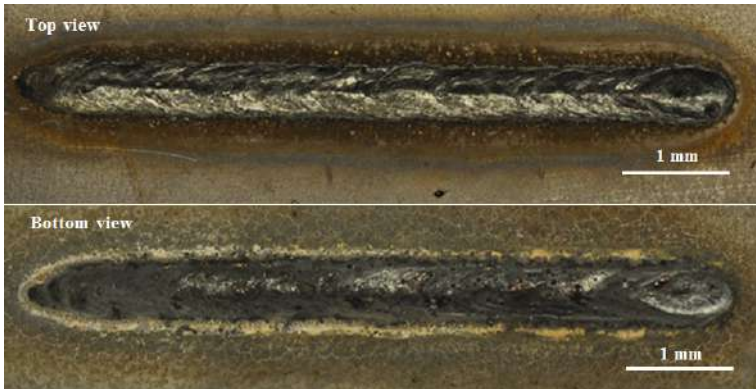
Top and bottom views of the weld obtained under a laser power of 2.0 kW and welding speed of 5 mm/s
